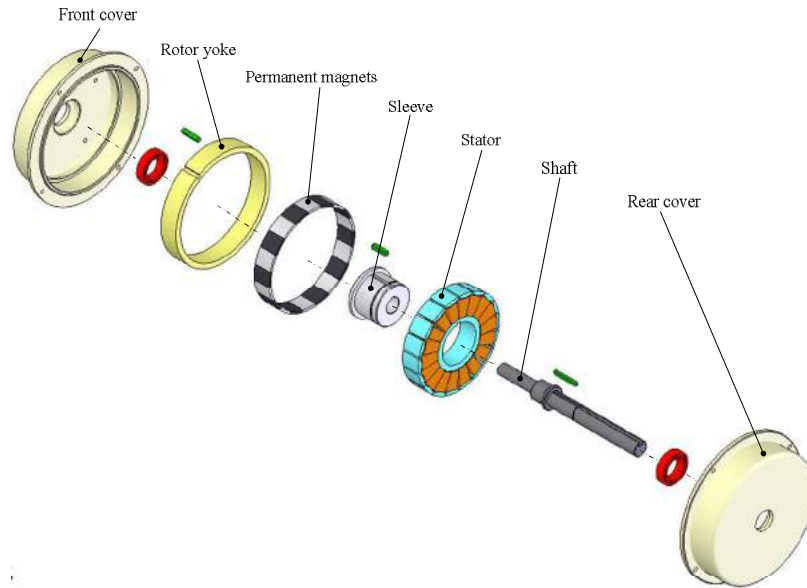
Exploded view of the design case I for the proposed BLDC motor.
